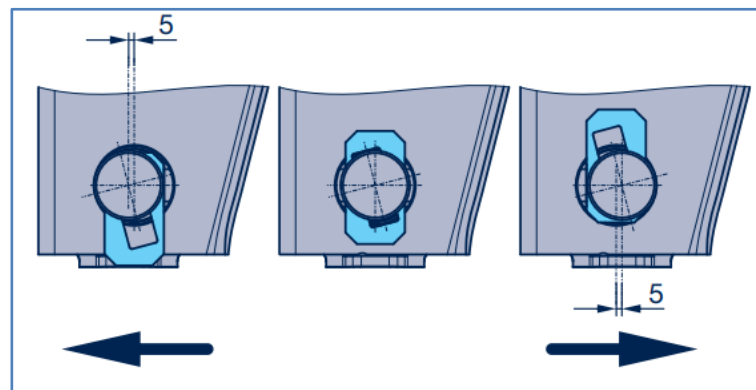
Axle tracking performed with the adjusting plates on adjustable hanger brackets
